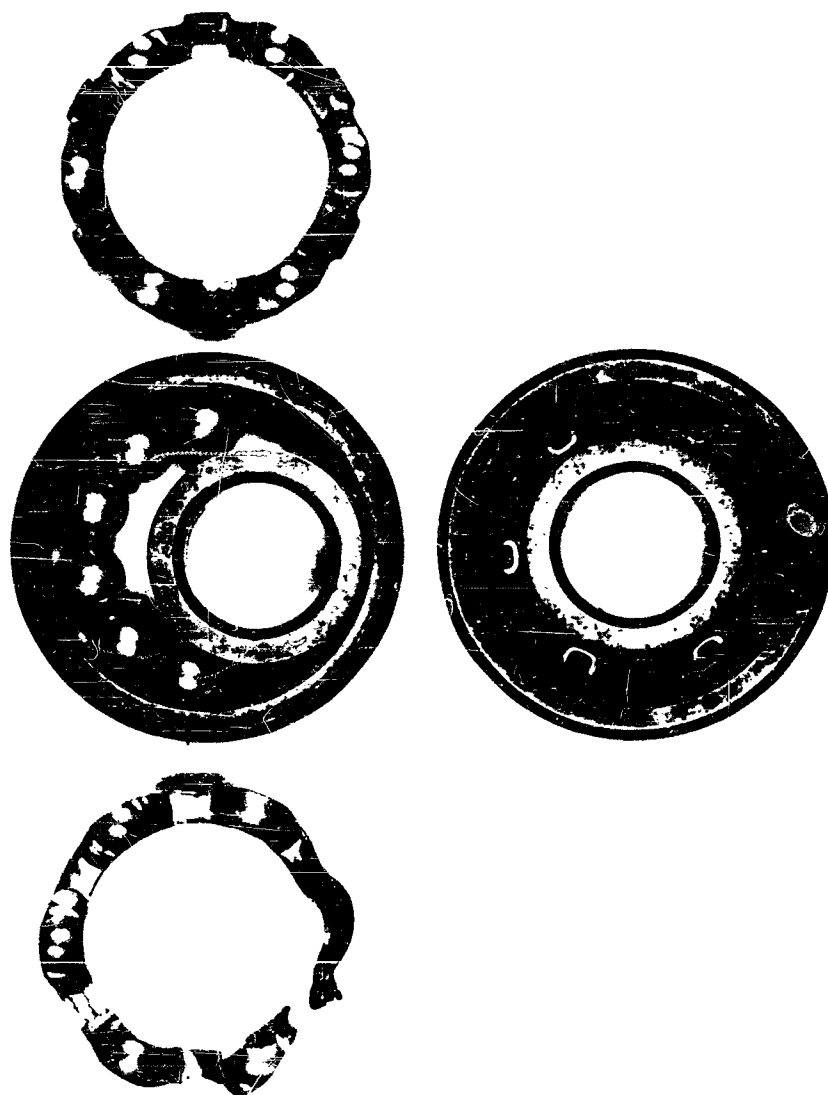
Failed Molybdenum Disulfide Lubricated Bearings
